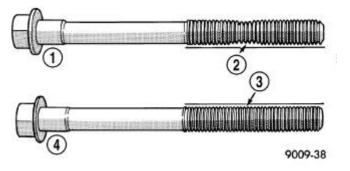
Check for Stretched Bolts Courtesy of CHRYSLER LLC
